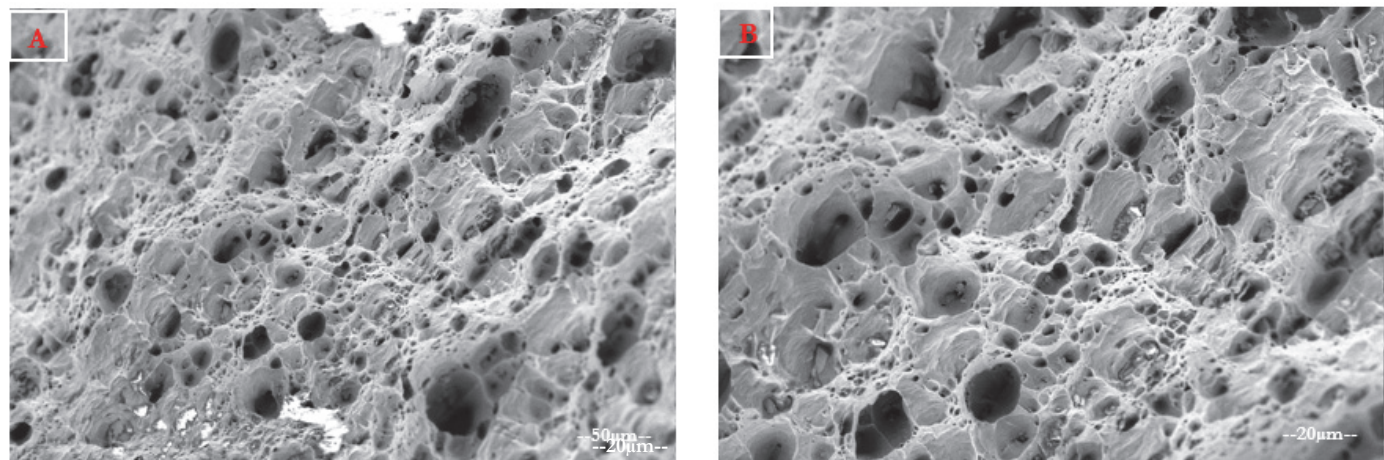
Fracture surface of Sample 5 (700 rpm, 30 mm/min) showing (a) Predominantly ductile dimpled morphology (b) Deep equiaxed dimples
